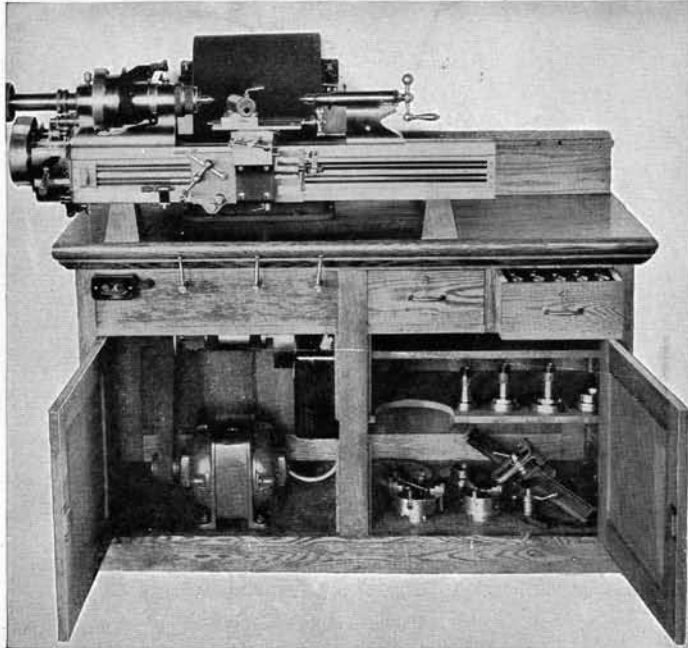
608 (5C.) Lathe with Quick Change Gear Box on Cabinet with Horizontal Safety Drive Countershaft (Patented June 18, 1929) and Jackshaft
